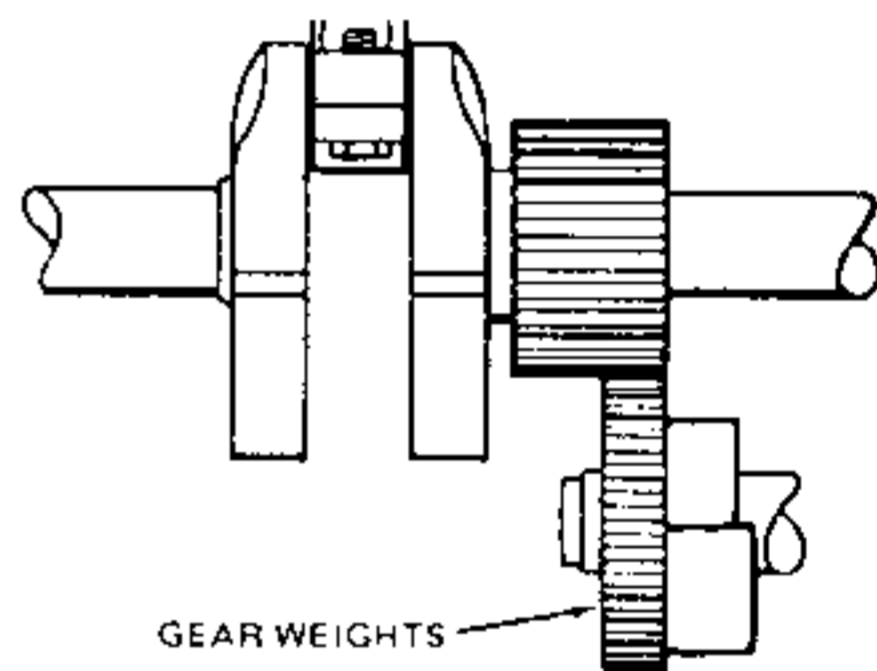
View showing correct balancer gear timing to crankshaft gear on Models HM80, VM80, HM100 and VM100. With piston at TDC, weights should be directly opposite.
